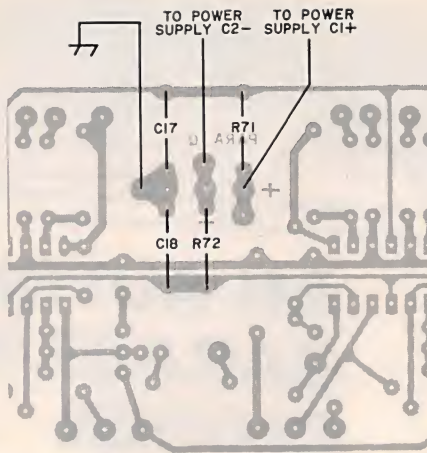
Special wiring of the main pc board for use with an ac power supply.
